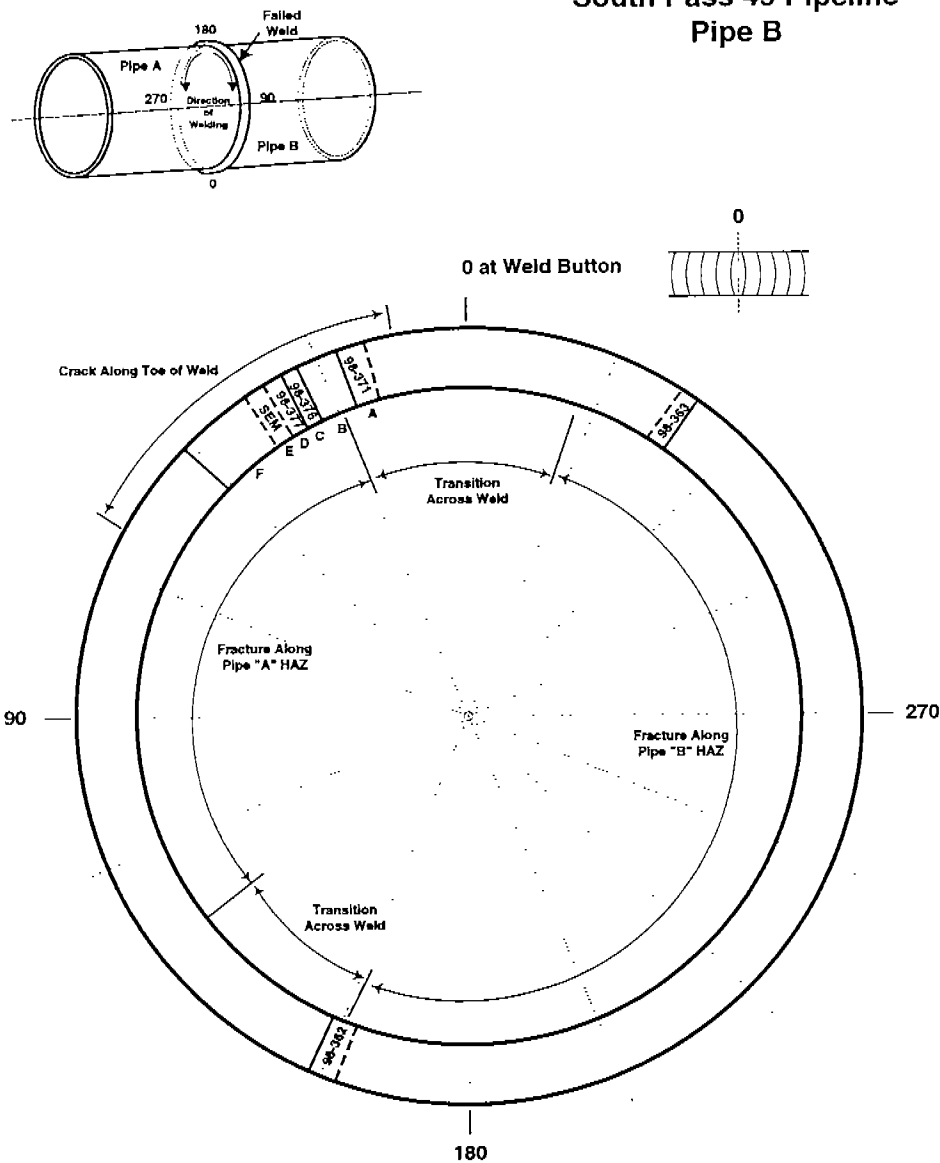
Schematic of pipe "B" side of fracture surface indicating location of fracture, secondary cracks, and metallographic samples.
